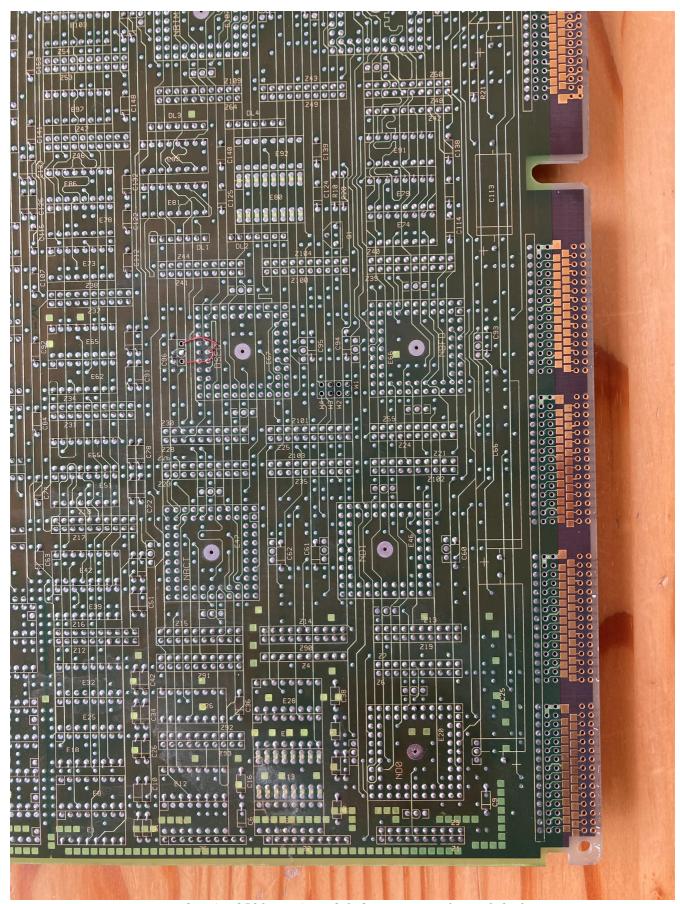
VAX 8530 NBIA module bottom view, lower left closeup
